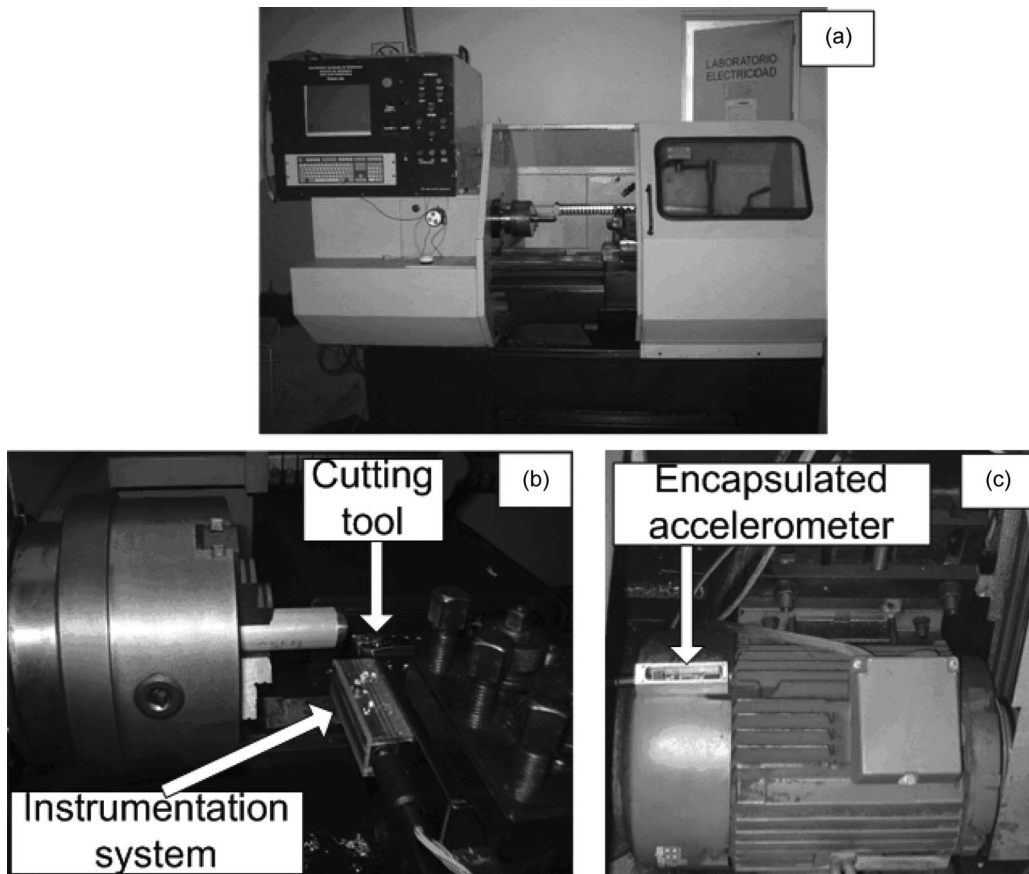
CNC test bench. (a) Retrofitted-to-CNC lathe. (b) Instrumentation system location near tool. (c) Encapsulated accelerometer on spindle induction motor.
